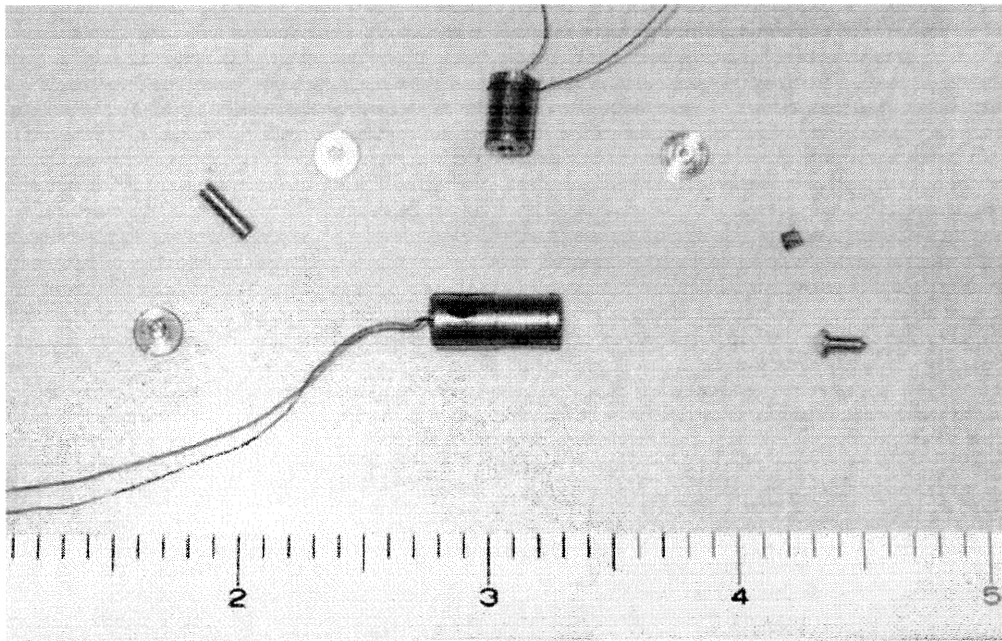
Photograph of a completed valve assembly surrounded by various parts and subassemblies.
